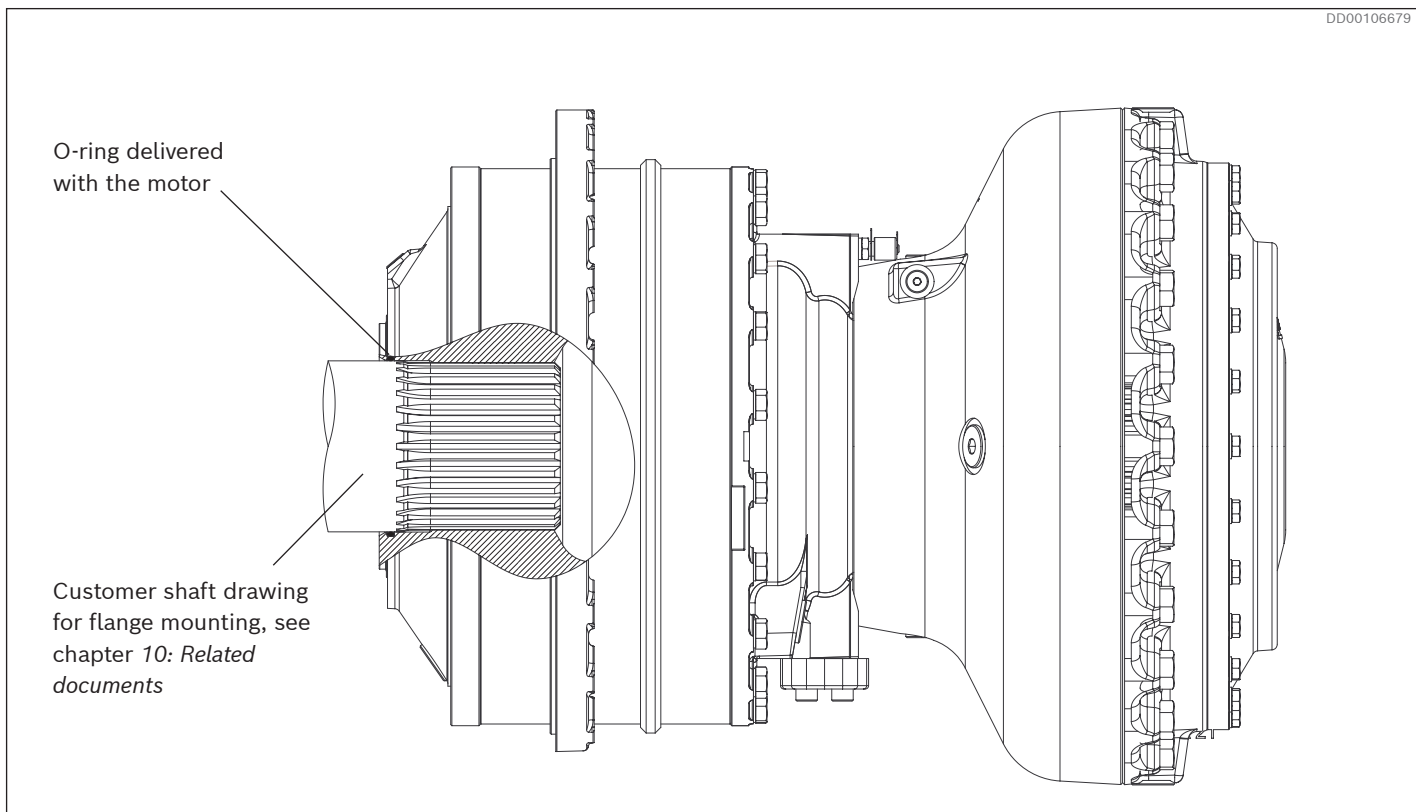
Example flange mounted CA motor with tandem mounted MDA 14 brake on customer shaft
